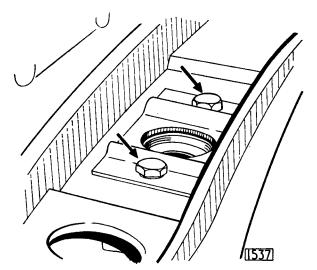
Showing the two setscrews which secure the bonnet catch striker plate
